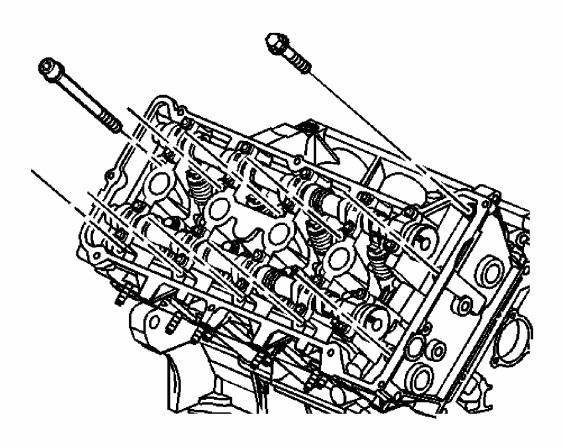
Identifying M6 External Drive Bolts Courtesy of GENERAL MOTORS CORP.
